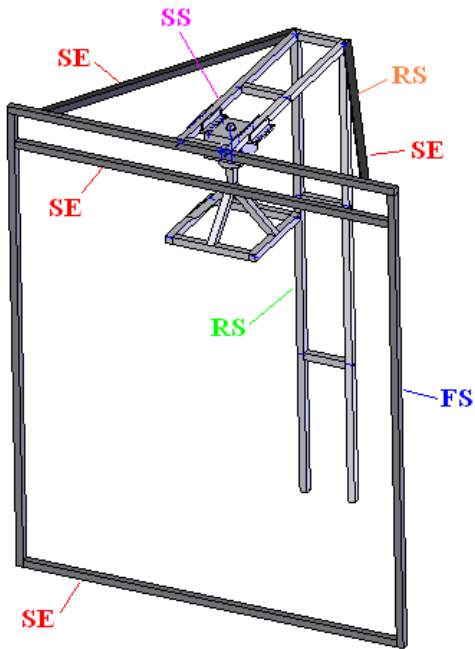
New frame with rear support (RS), front support (FS), suspended section (SS), and stabilizing elements (SE) shown
